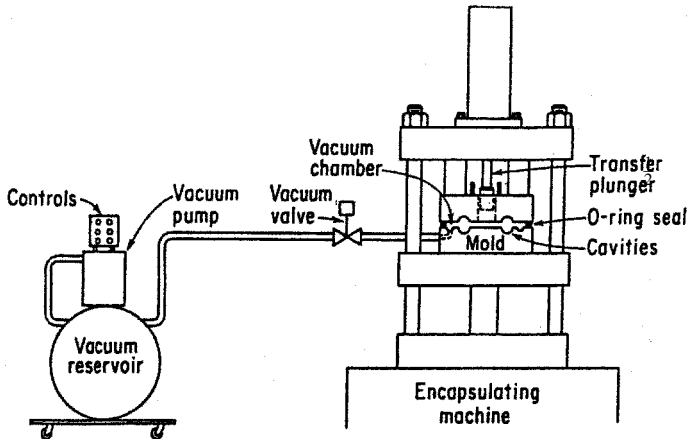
Vacuum-assisted venting. The vacuum line is connected to the manifold reaching all cavity vents. After the mold is closed, the vacuum valve opens, drawing cavity into the vacuum reservoir. The valve closes when the cavity is full.
